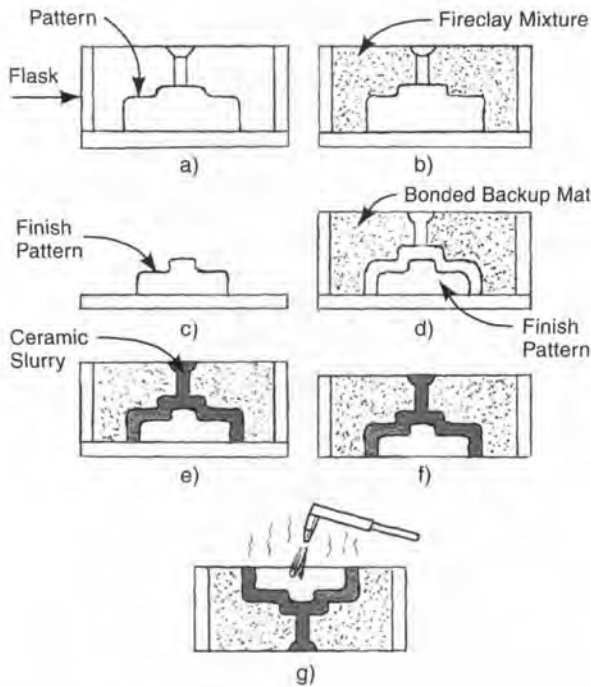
C3 The Shaw process for making composite molds. Two patterns are used, one to form the finish cavity, the other to form a somewhat larger cavity. The ceramic slurry poured between the larger cavity and the finish mold forms a ceramic shell suitable for accurate castings of many materials. a) The pattern for the backup material is placed in a flask. b) A fireclay mixture is introduced to the flask and is compacted by ramming or vibration. Containing sodium silicate, the mixture is bonded by gassing with carbon dioxide. c) The finish pattern on a pattern plate. d) The finish pattern and the bonded backup material are assembled in the same flask. e) Ceramic material in slurry form is poured into the opening between the backup material and the finish pattern. f) The finish pattern is removed. g) The mold half is inverted and heated by torch to burn off volatiles. Two mold halves, thus formed, are assembled together and are ready for pouring.
